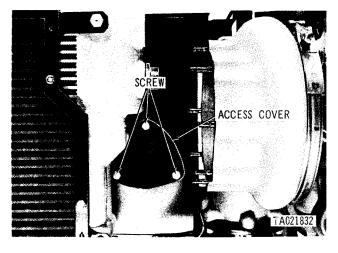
Removing installing valve timing access cover. 2-157). Turn valve adjusting screw and set valve clearance to 0.100 inch, using thickness gage blade part number 10882617. Gage blade must move through clerance with a slight drag. Torque tighten lock nut to 175 pound-inches after setting clearance. Check clearance to make certain setting has not changed.
